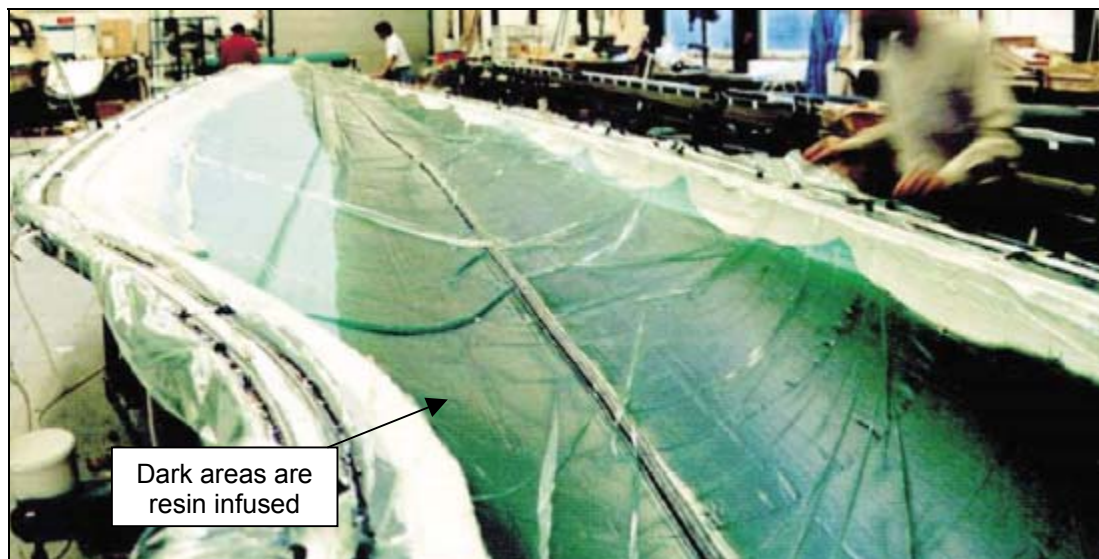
One half outer rotor blade skin during vacuum injection [8]
